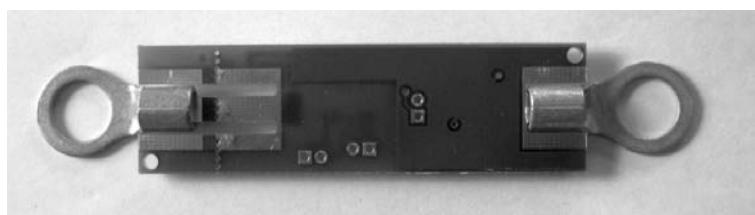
Cell board for prismatic cell with two ring terminals mounted to the PCB.
